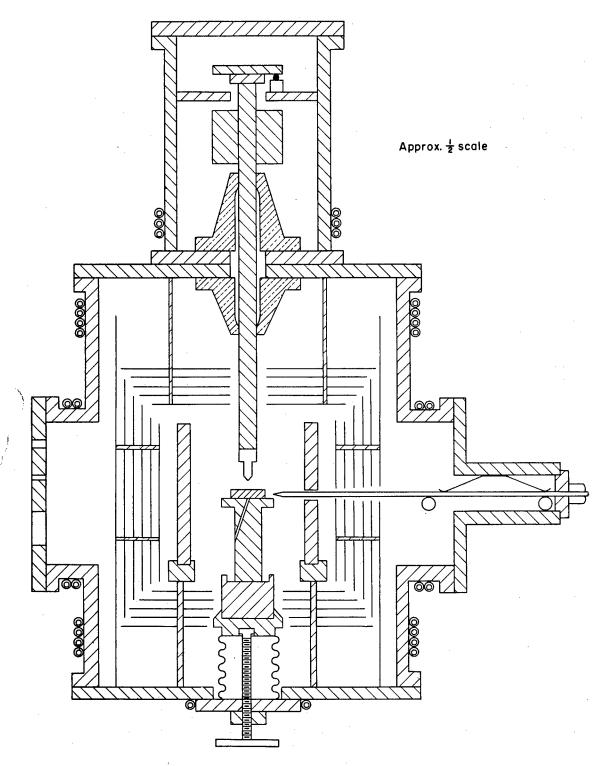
FIGURE I. VACUUM HOT-HARDNESS MACHINE
